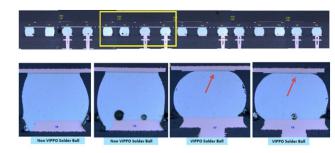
Solder Separation on Fine Pitch TV Control Boards
